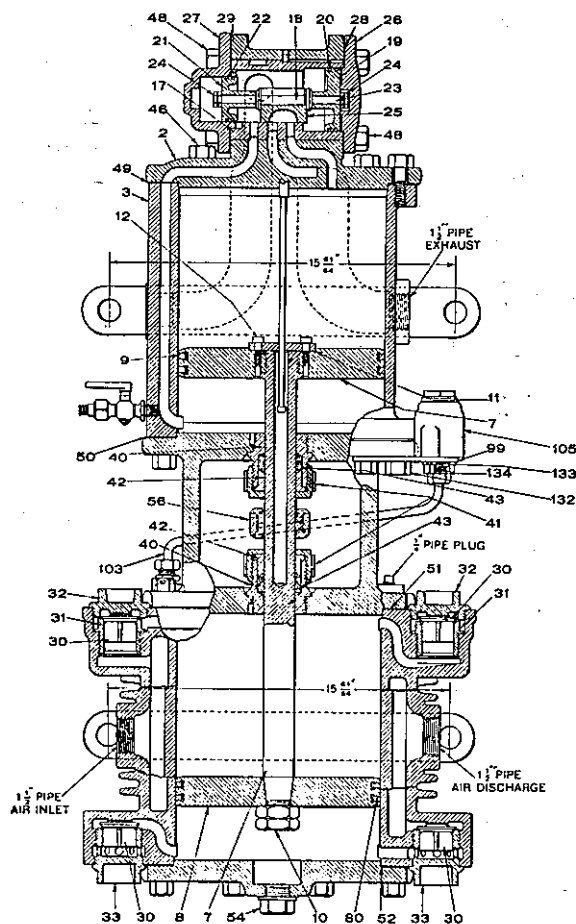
9 1/2" Air Compressor sectional assembly view
